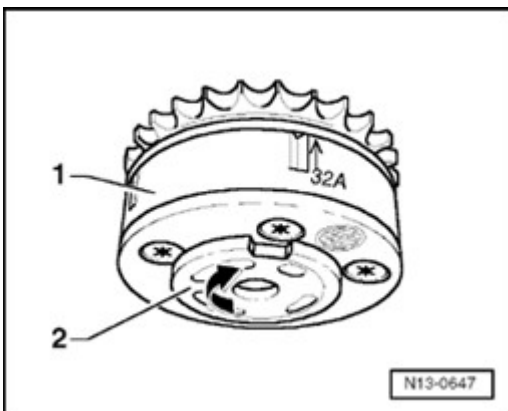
Turning Sender Wheel Clockwise In Camshaft Adjuster (Exhaust Side)
